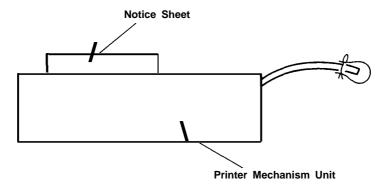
Notice Sheet on Spare Printer Mechanism
